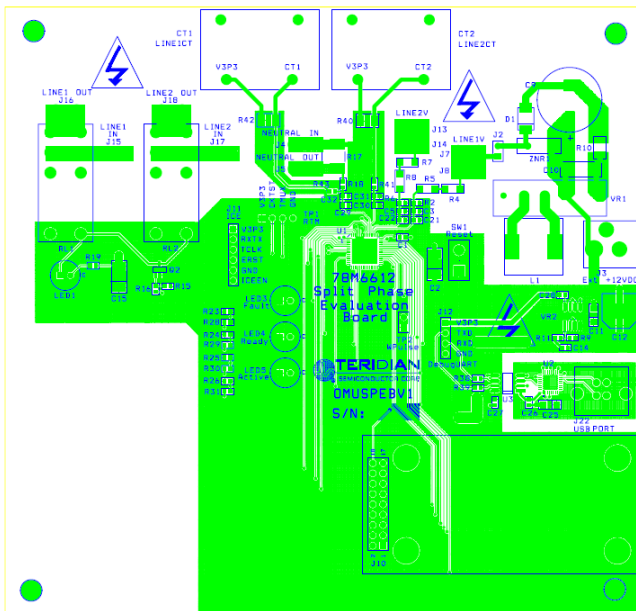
78M6612 Split Phase Evaluation Board PCB Top View
